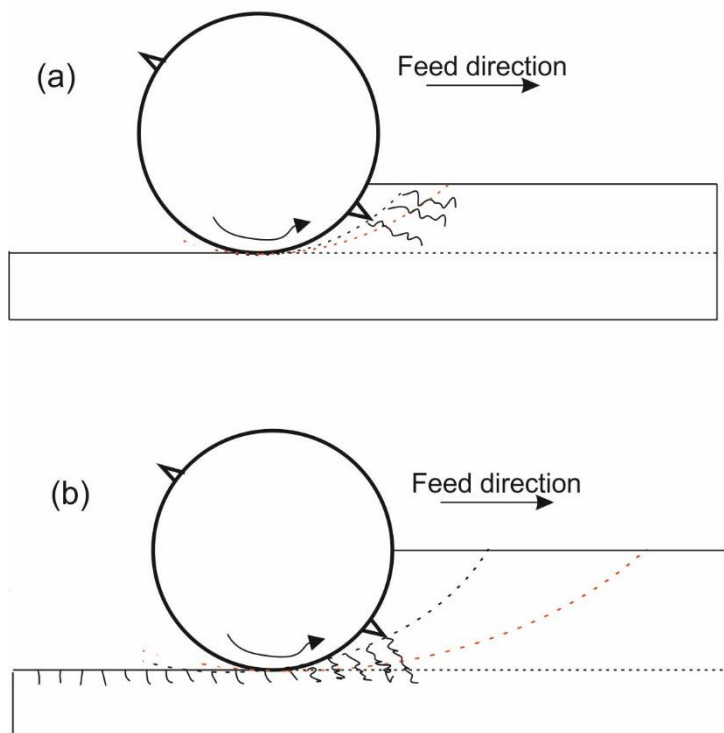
A two fluted tool cutting a chip (a) Shallow cuts avoid cracks in finished workpiece (b) When the chip thickness becomes too large cracks may propagate into the finished surface.
